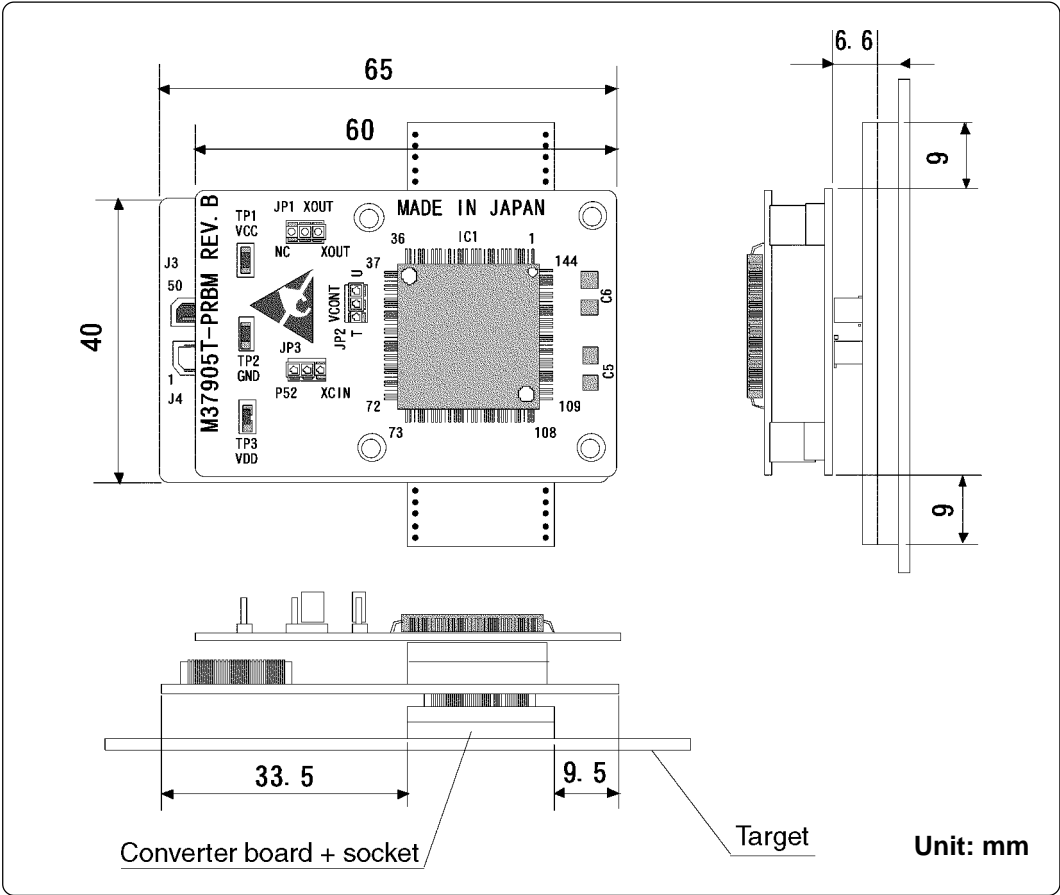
External dimensions of the pod probe (M37905T-PRB)
